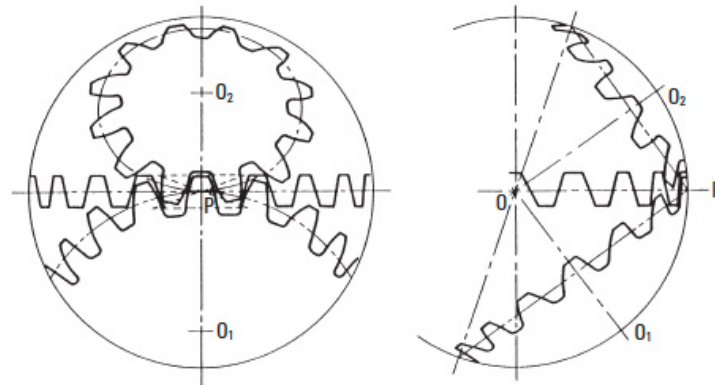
Meshing Bevel Gear Pair with Conjugate Crown Gear
